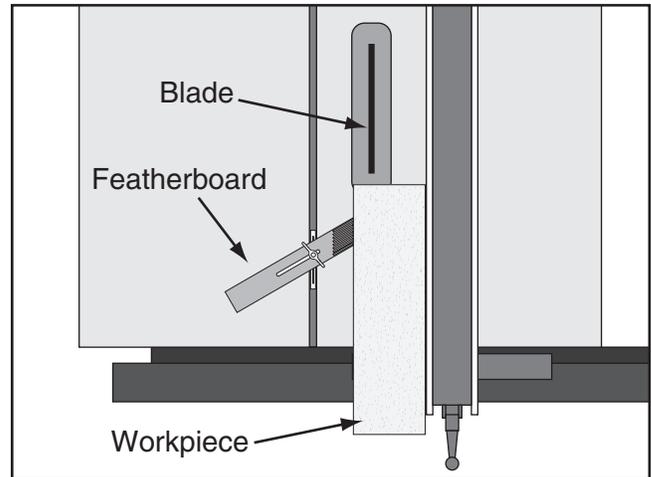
Featherboard installed in miter slot and supporting workpiece for ripping cut.
